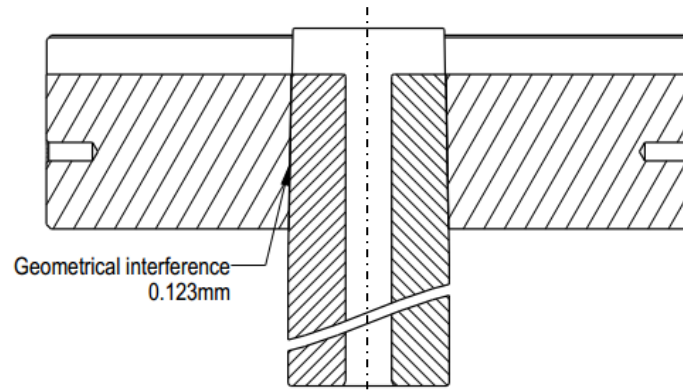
Sectioned view of I-ECAP die assembly with geometrical interference.
